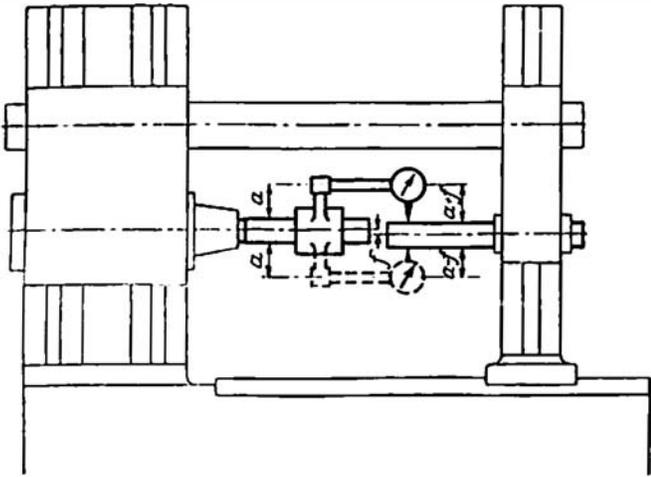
(See page 31 and Fig. 1A-c). Tolerances in Testing the alignment of Two Axes by the Swing-over Method
